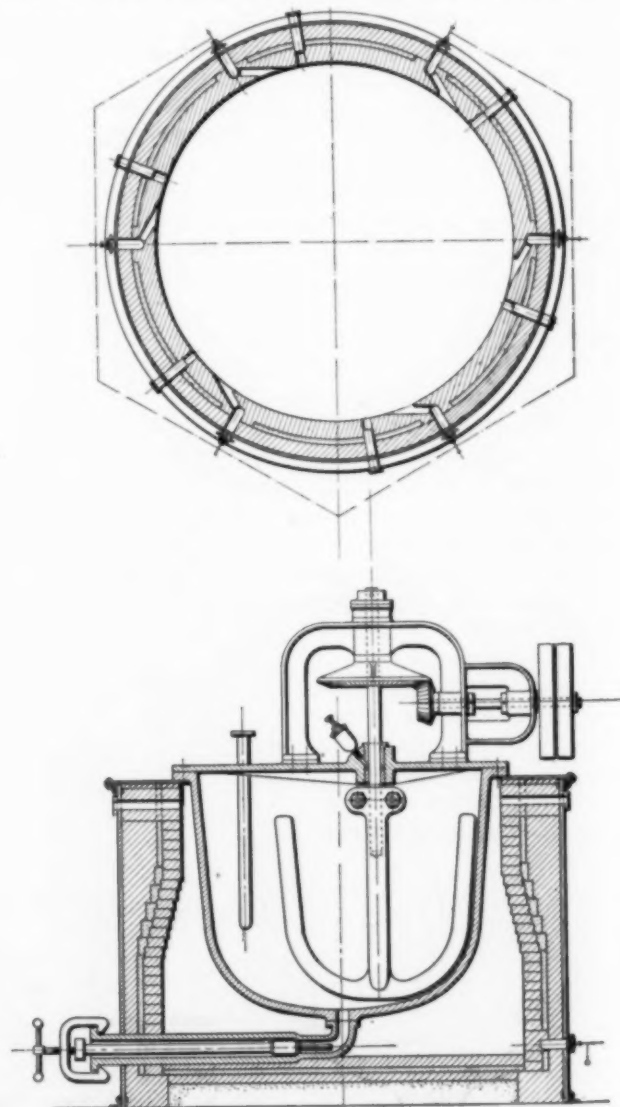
FUSION KETTLE WITH OFF-CENTER TYPE AGITATOR IN A SETTING EXCELLENTLY ADAPTED FOR FUSION KETTLES WITH BOTTOM DISCHARGE
